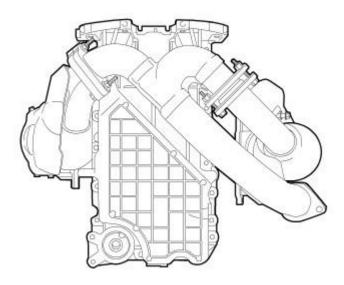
ENGINE OIL FILTER AND COOLER Courtesy of CHRYSLER LLC
